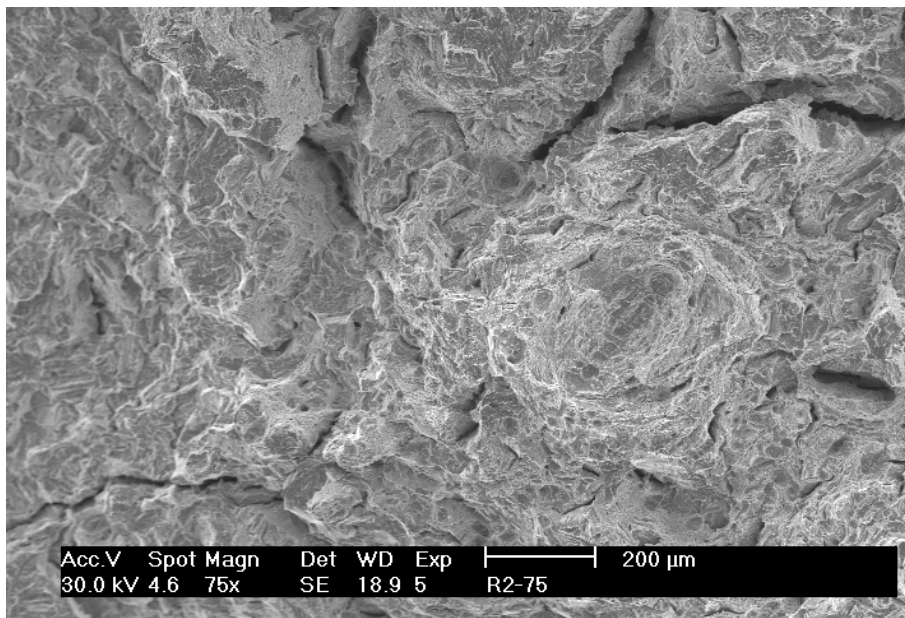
Fracture surface for 2mm notched specimen tested at  $-75^{\circ}\text{C}$ .
